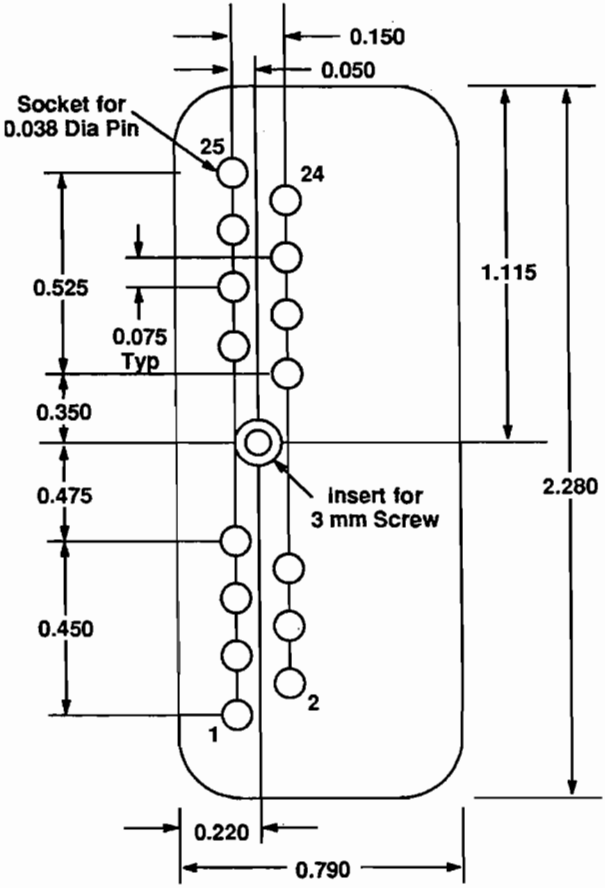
Mechanical Dimensions of the 6B Series Module, showing location of socket pins and hold down screw
